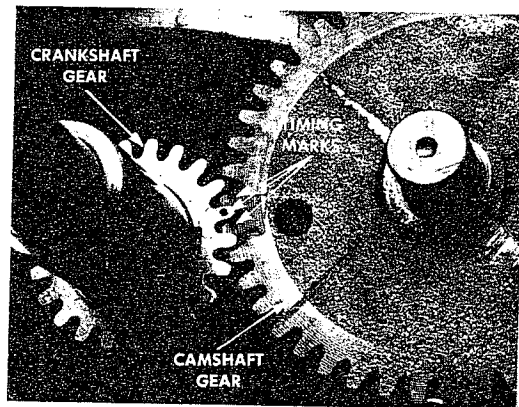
Timing marks are used to line up cam and crankshaft.
